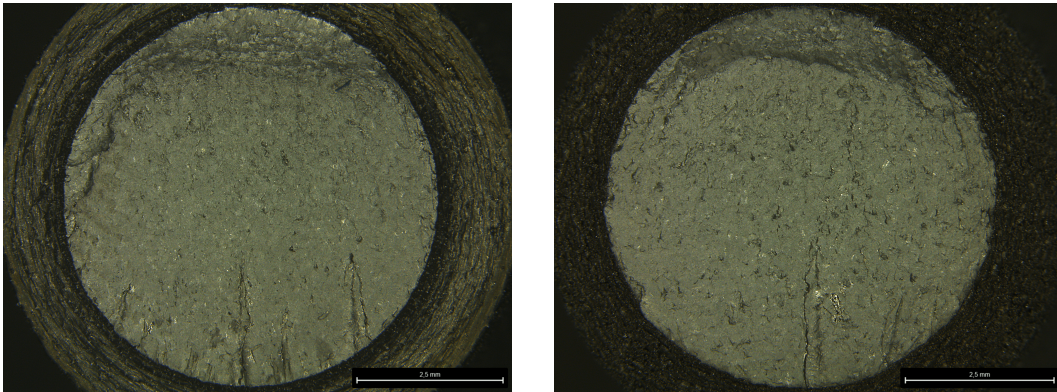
Fracture surface specimen A2.2(30):3 (left) A2.2(30):5 (right).
